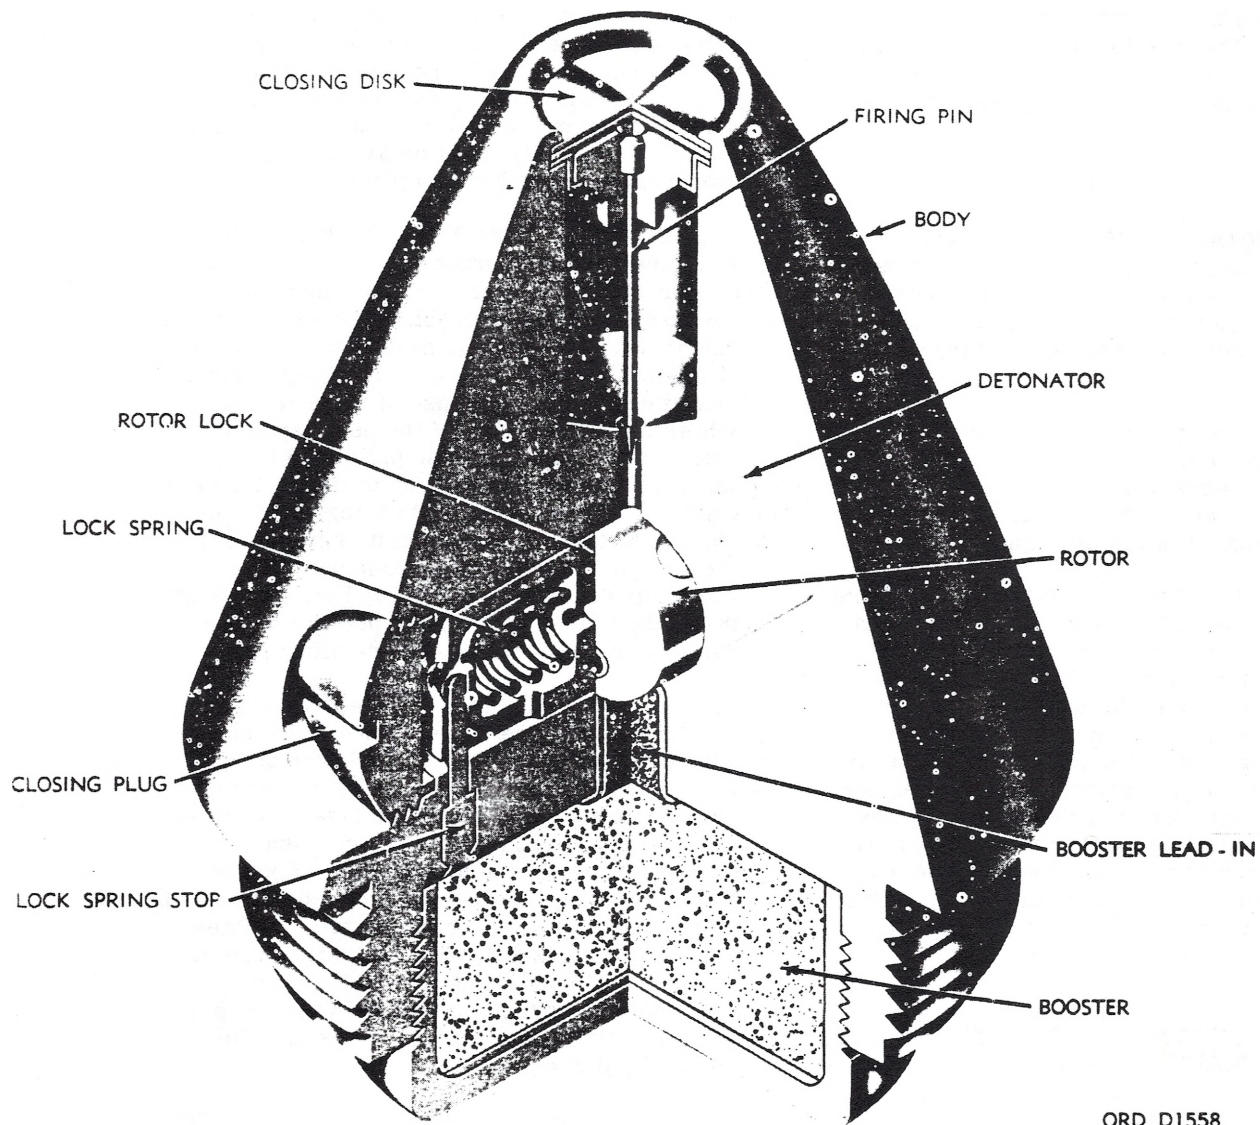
Fuze M89, Cutaway View Showing Unarmed Condition
